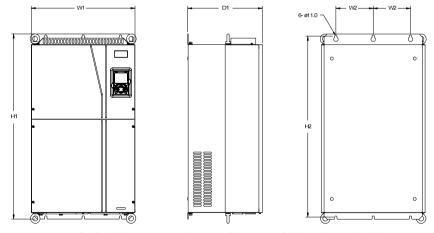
Wall-mounting diagram of inverters of 660 V, 160 to 220 kW
